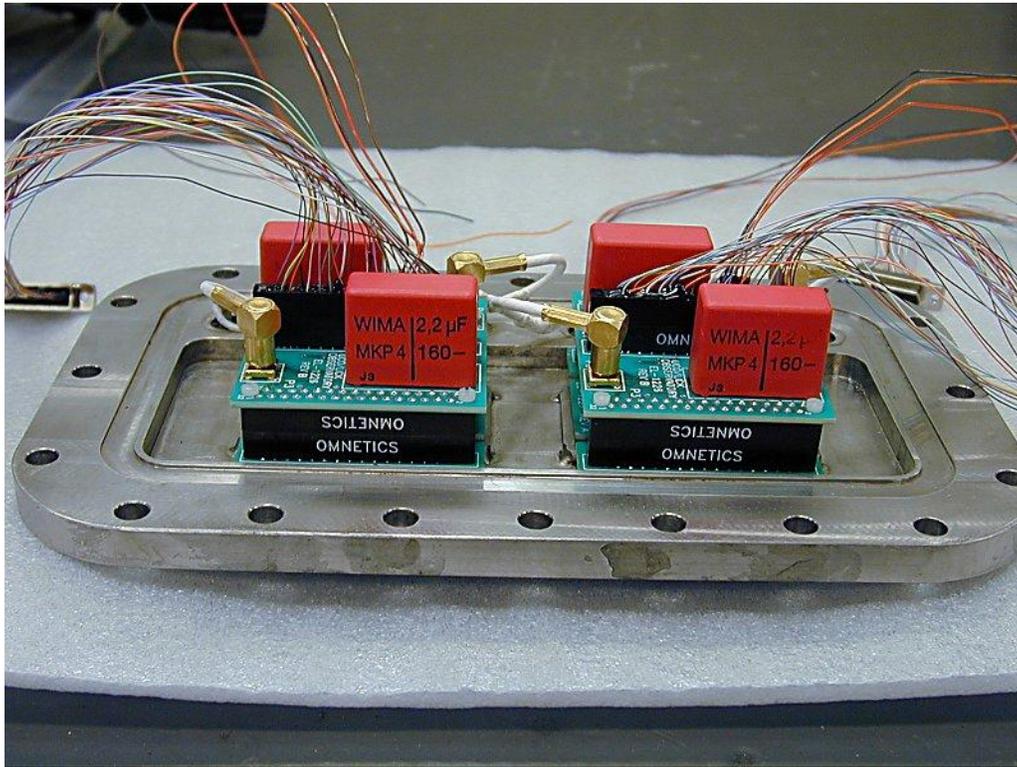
Earlier version of the detector vessel's FC plate indicating the internal circuit boards & CCD wiring harness. The harness is attached to the CCD Interconnect board, which piggy-backs onto the Hermetic Connector board.
